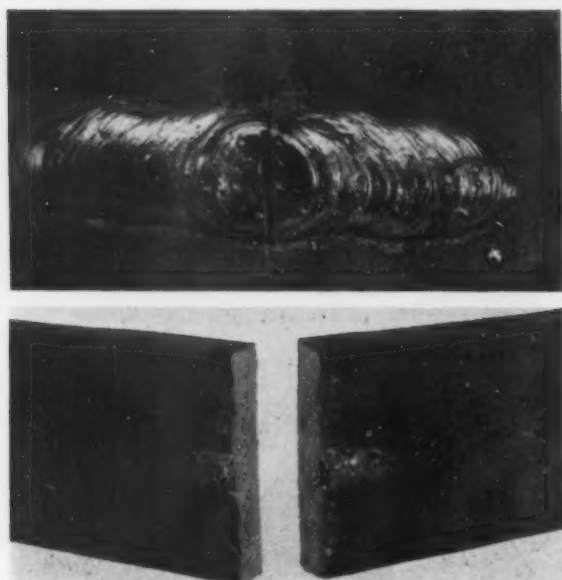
Brittle weld bead was used to develop sharp notch in nodular iron specimen broken in test (bottom) and specimen which resisted fracture (top). Cut in weld locates notch in center.
